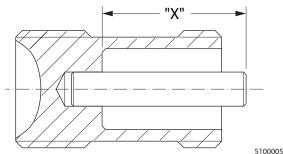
PCOR/PC Adjusting Screw Stop Pin
